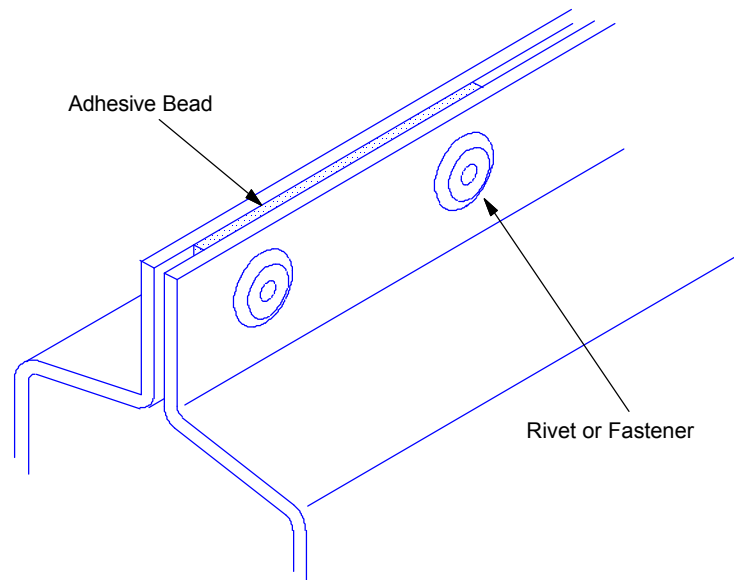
Mechanical fasteners, such as rivets, can be employed to develop handling strength¹
